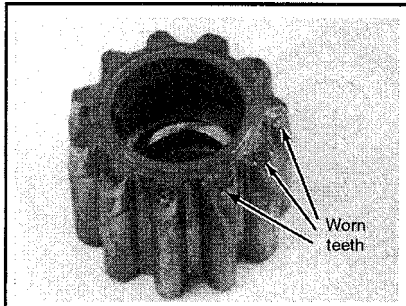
Check the pinion gear for damaged or worn teeth and replace, if necessary
